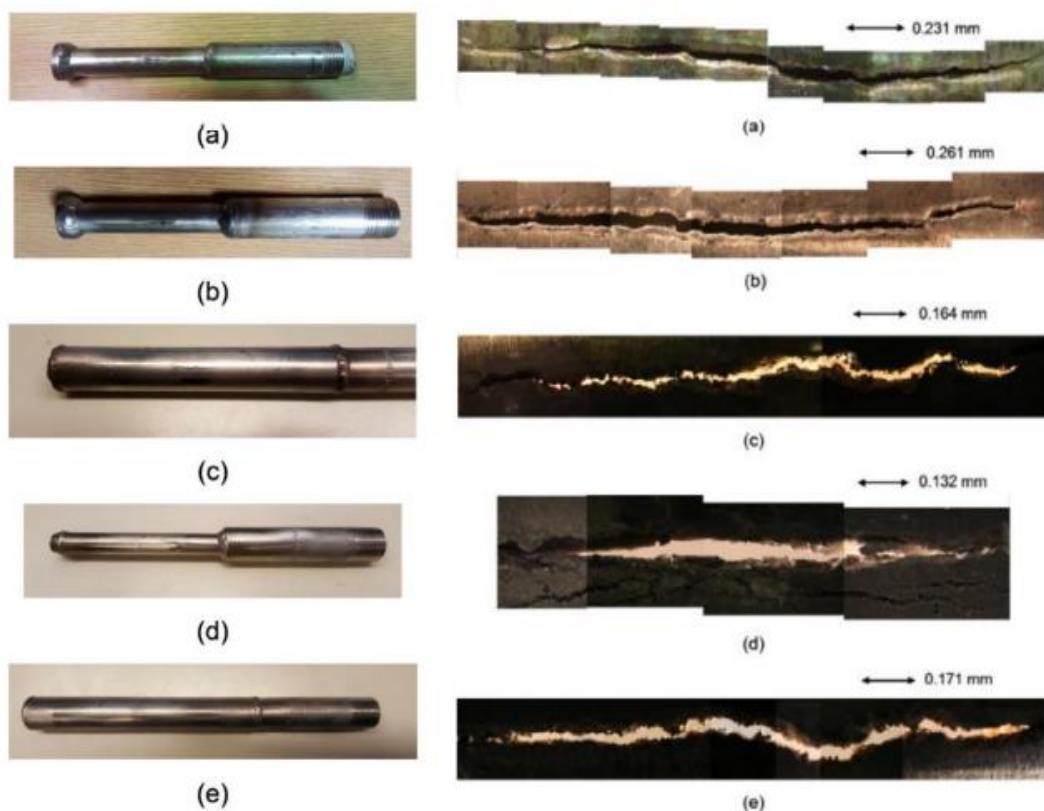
Steam generator tube samples and cracks (Revankar&Riznic, 2019)
